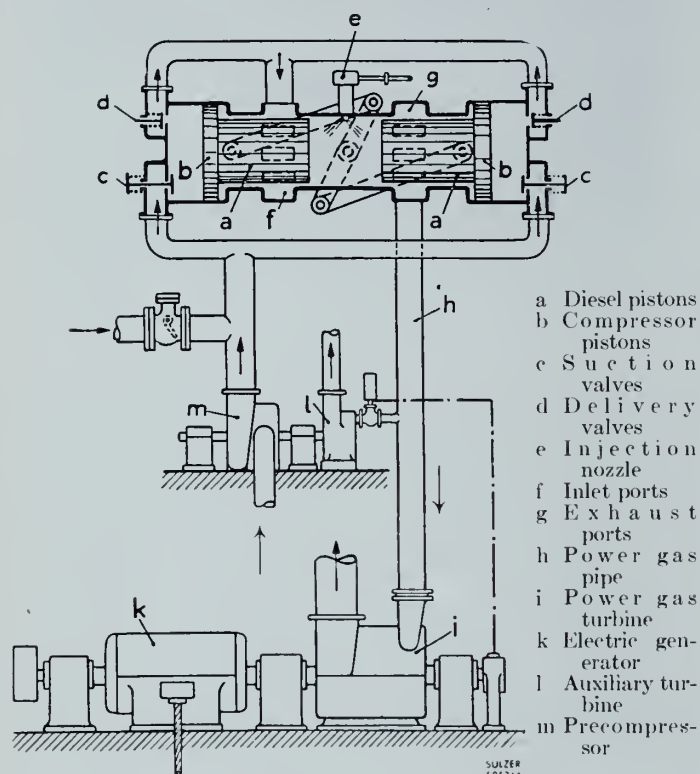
Power gas process with free-piston power gas generator. The two Diesel pistons *a* with the built-on compressor pistons *b* are connected to each other by a synchronising device. The two Diesel pistons are pushed inwards by the expansion of the air remaining in the compressor cylinders, thereby compressing the air contained in the Diesel cylinder. The fuel injected through the nozzle *e* is burnt in the highly compressed air, after which the two Diesel pistons are forced outwards. Then the air drawn in by the compressor pistons during the previous stroke is compressed. The compressed air delivered by the arrangement serves for scavenging and charging the Diesel cylinder. The exhaust gases, here called power gases, drive the exhaust gas turbine *i* coupled to an electric generator *k*. The auxiliary turbine *l*, which is also connected to the power gas pipe *h*, drives the precompressor *m* which precompresses the air entering the compressors and thereby supercharges them.
